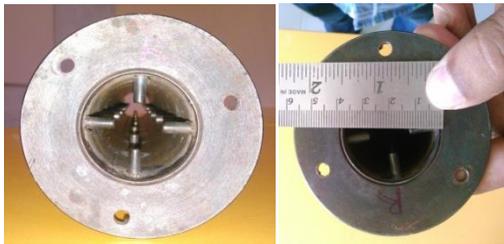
Test specimen with the pin fins inside the tube and Dia of test specimen
